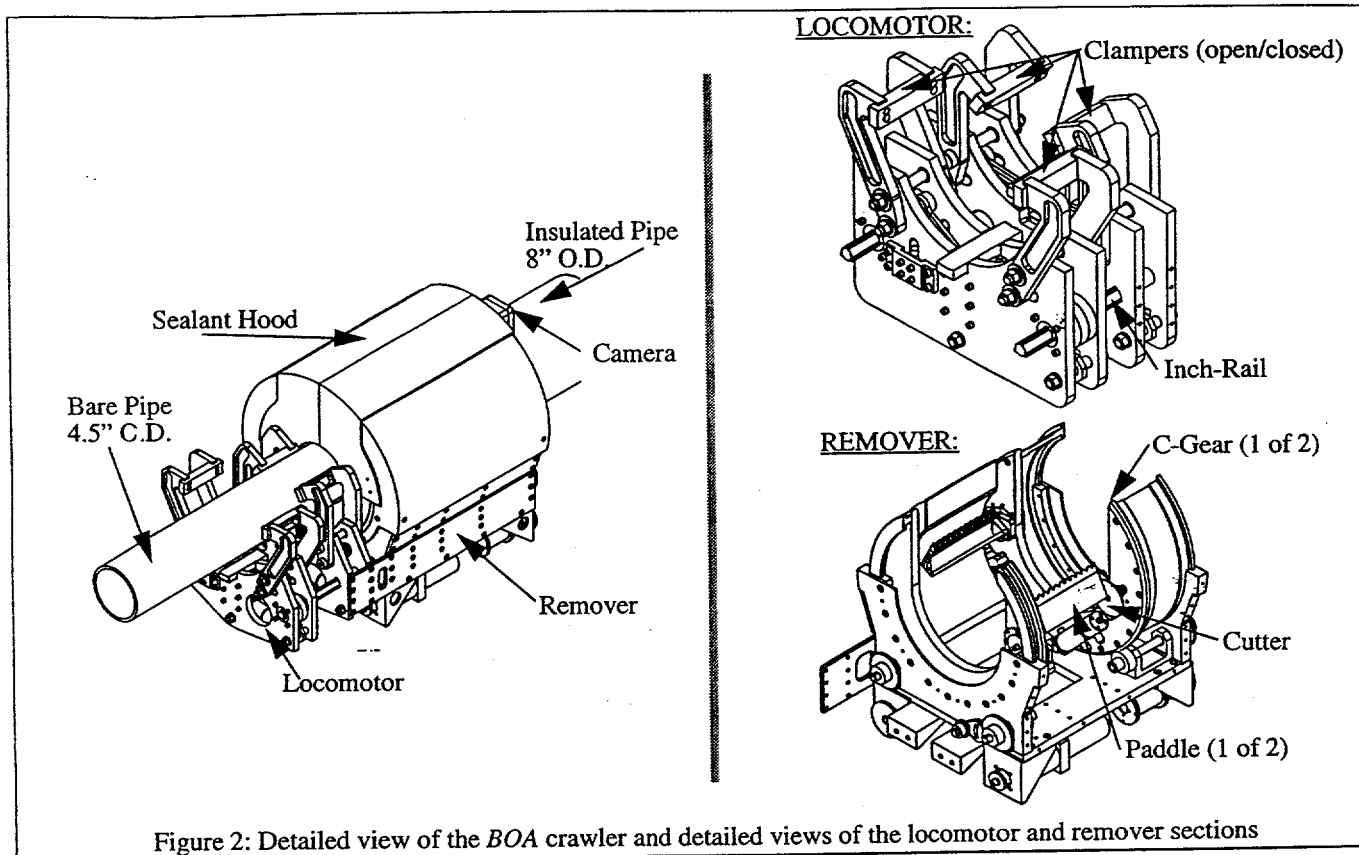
Detailed view of the BOA crawler and detailed views of the locomotor and remover sections
